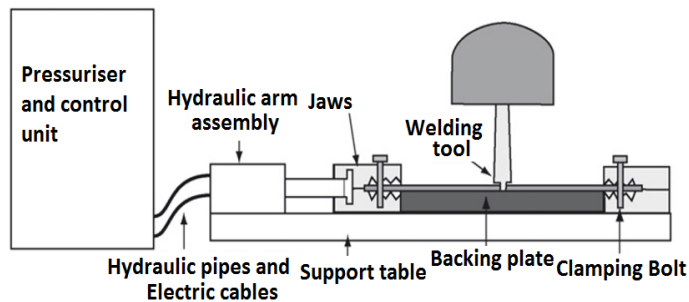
Schematic representation of mechanical tensioning method used for friction stir welded plates [34].
